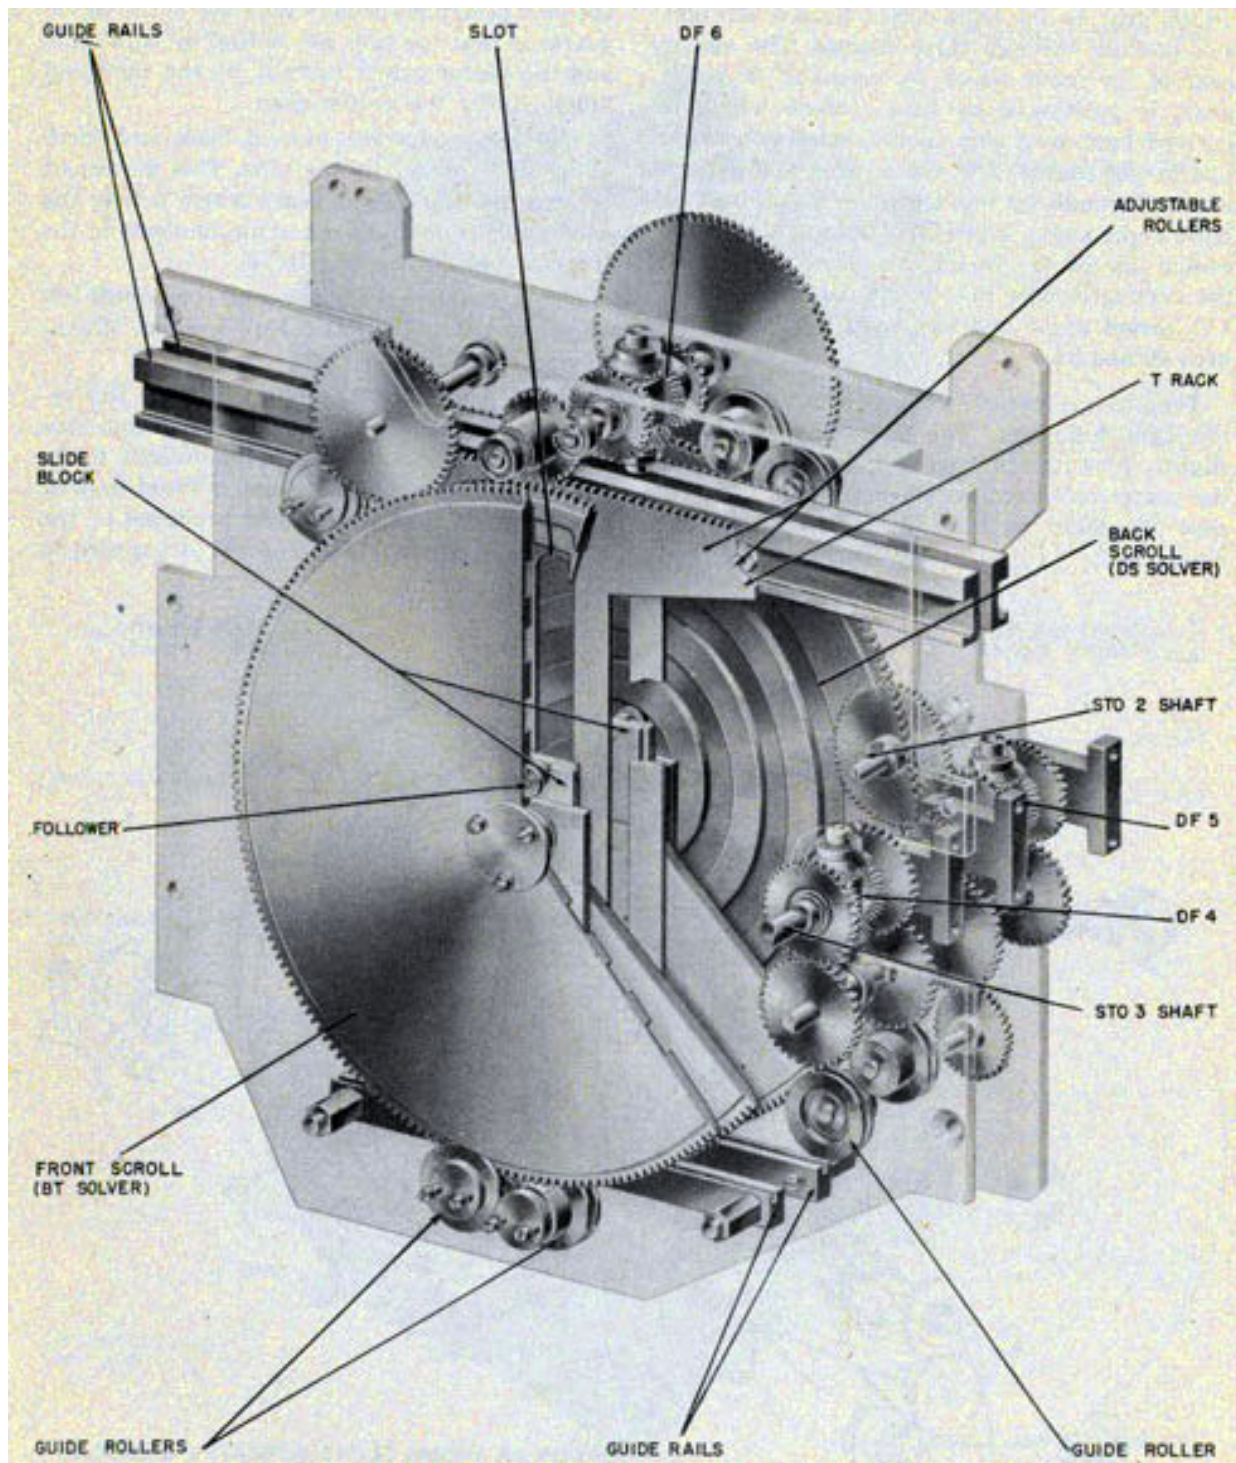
Cutaway view of angle solver assembly showing gearing and shafting between front and back scrolls.
